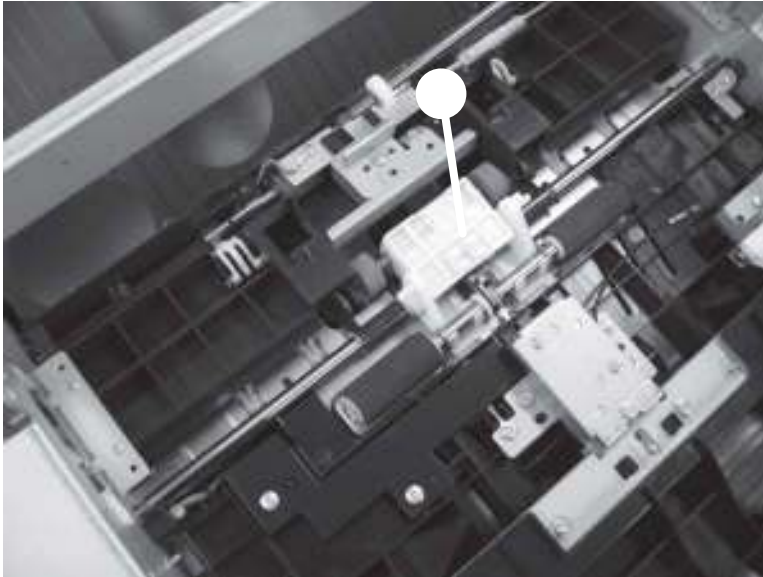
Remove the pressure roller assembly (7 of 8)
